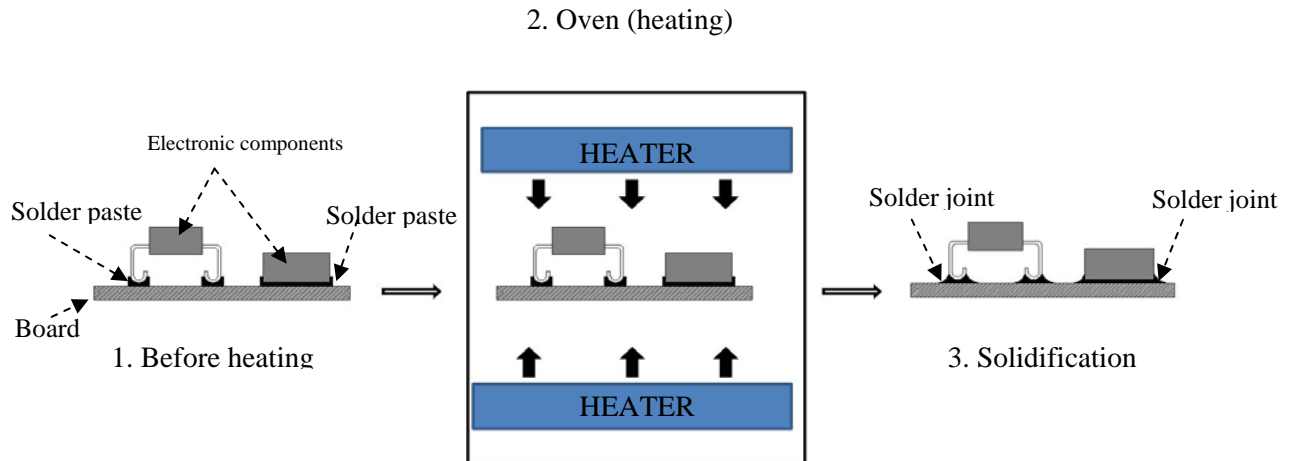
Reflow soldering technique. 1.) Before heating solder paste is placed in between electronic components and circuit board. 2.) The system is then placed in an oven, where solder particles present in solder paste melt and spread over the interface. 3.) Joints are formed upon cooling.
